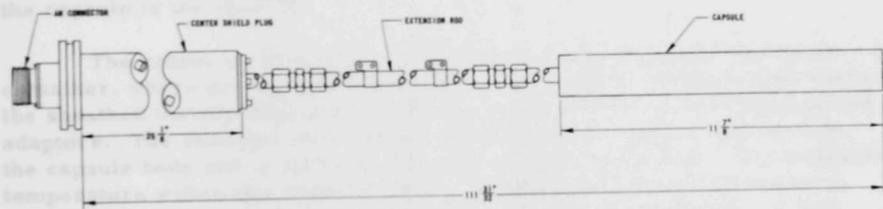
Irradiation Capsule Attached to Center Shield Plug
